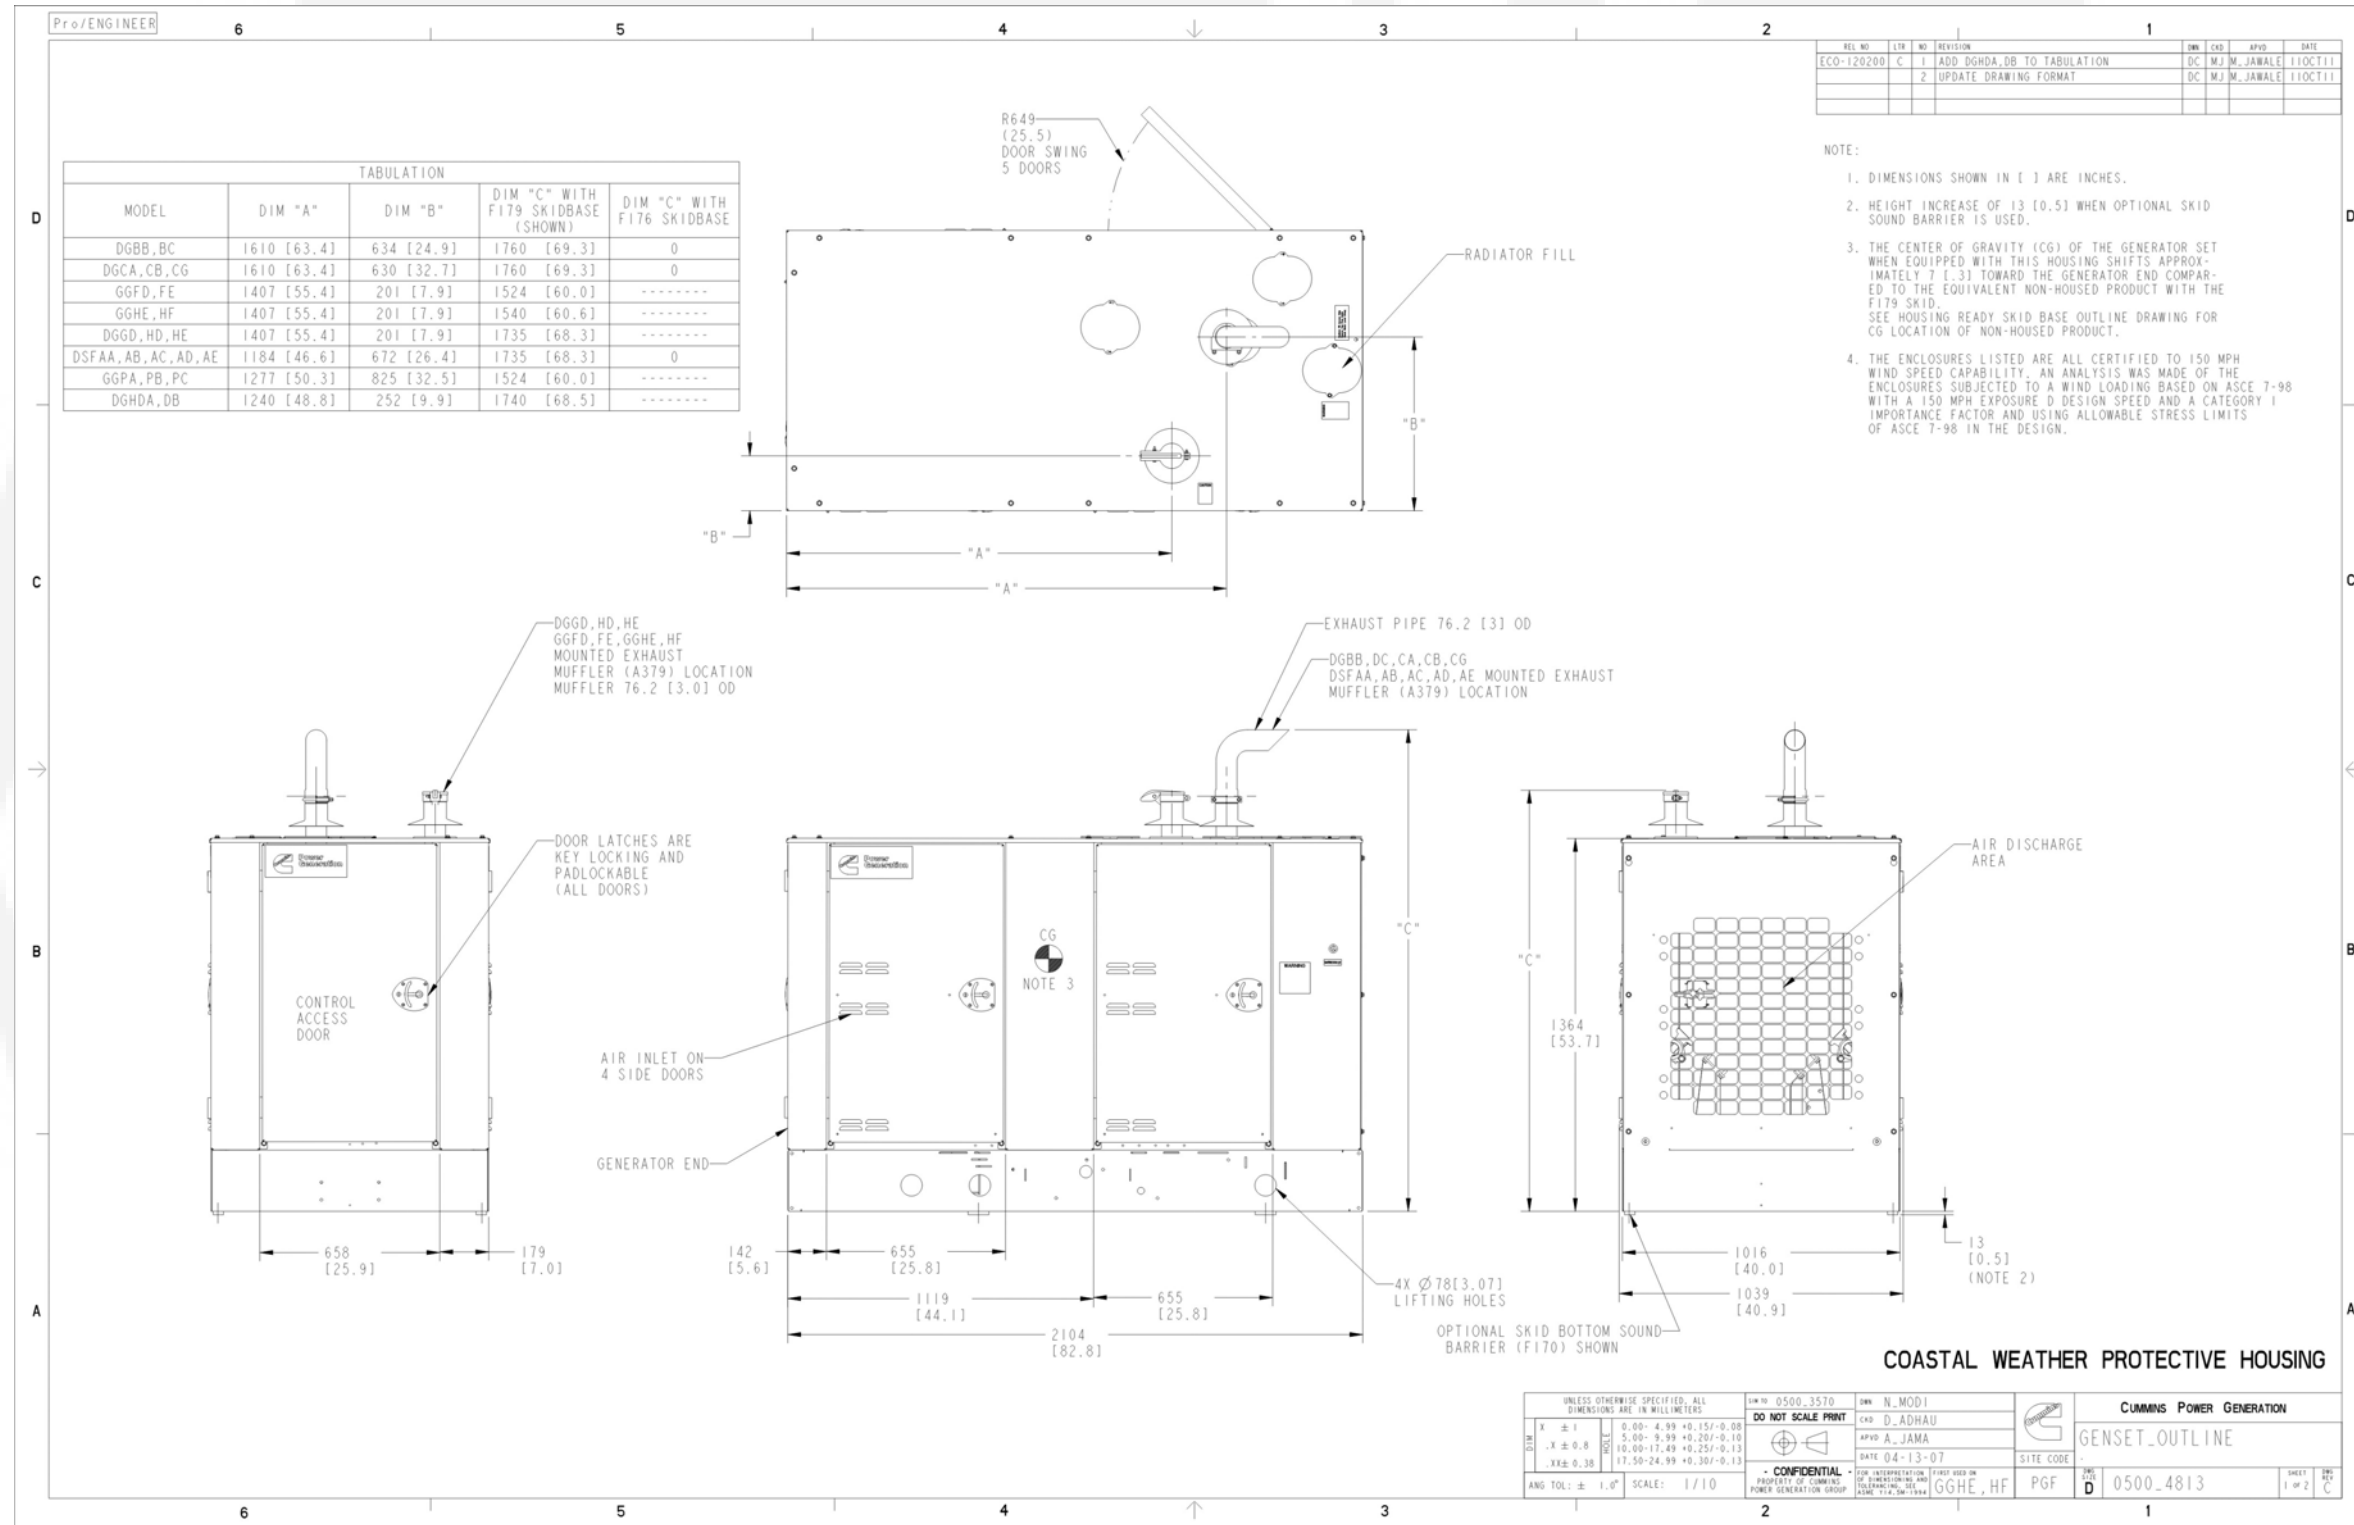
OUTLINE DRAWING (0500-4813 SHEET 1)
